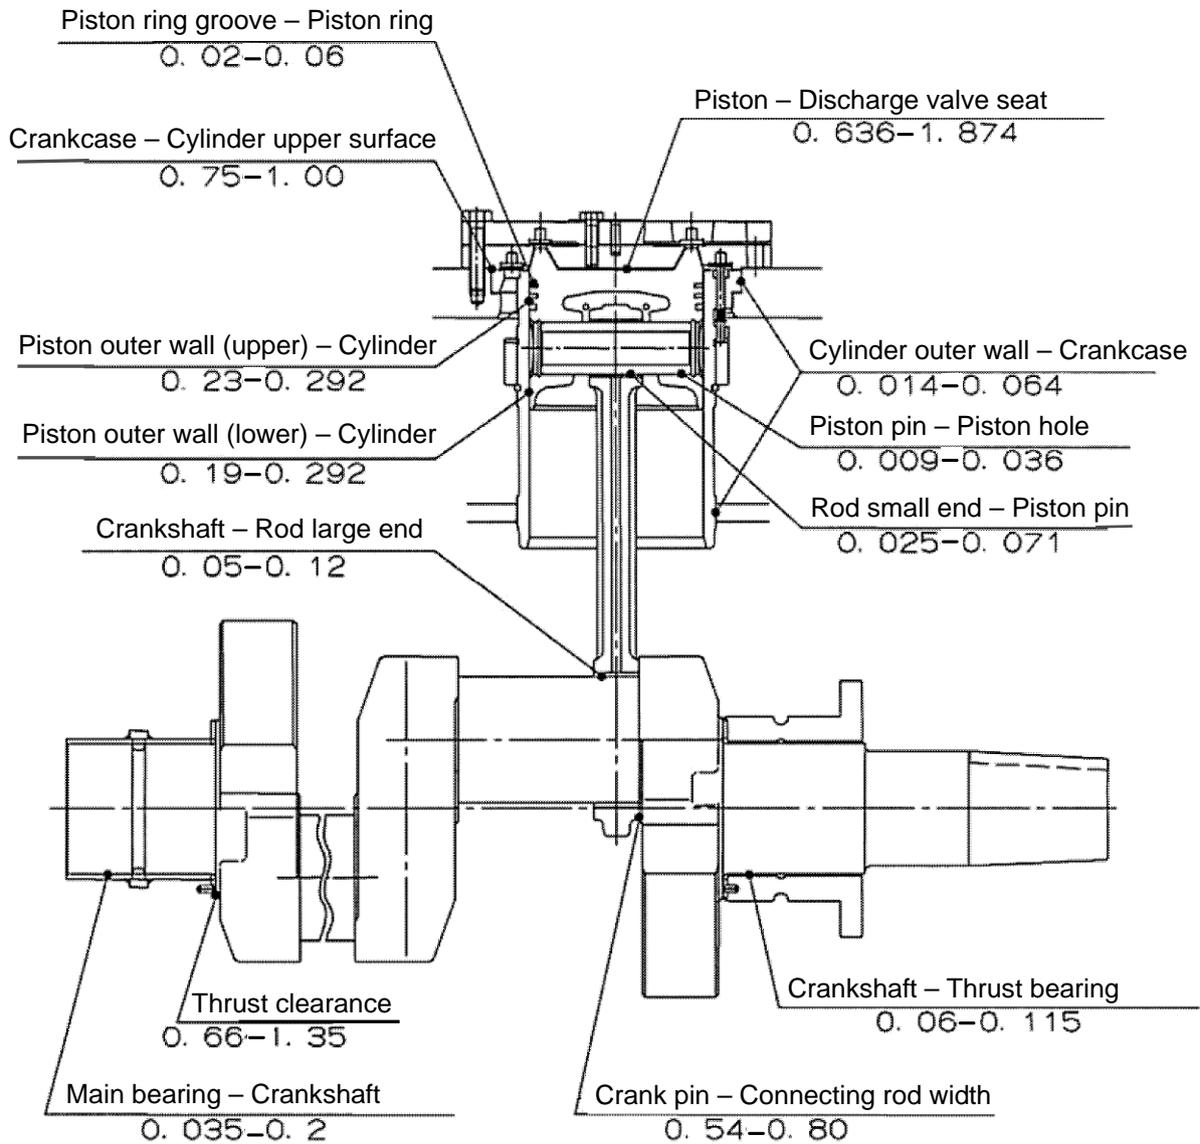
Standard Assembly Clearance (Unit: mm)
